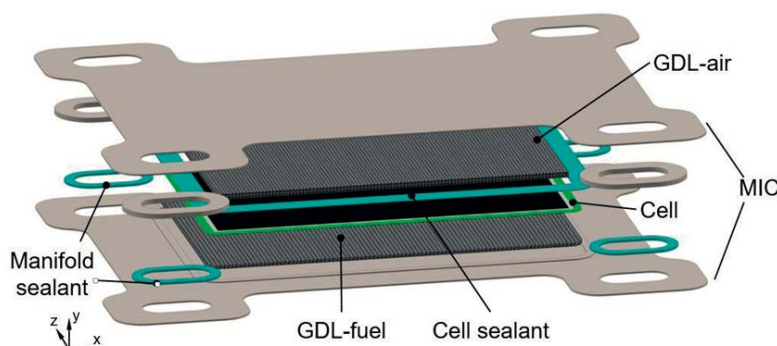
exploded picture of a basic repeating unit of a stack, showing the main components: metallic inter-connect (MIC), gas diffusion layer (GDL), sealant and cell.
